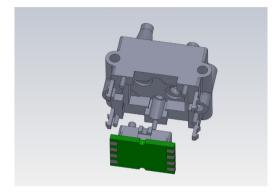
3D views of a custom adaptor for the LME pressure sensor
